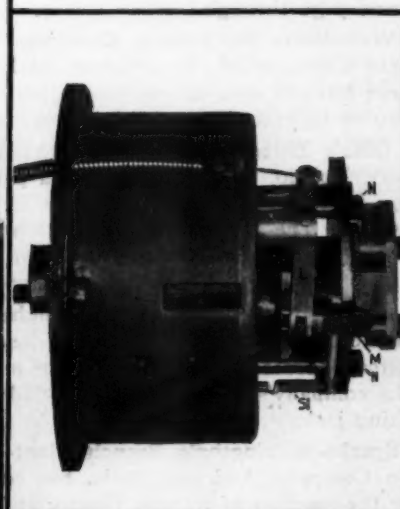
Pedal side of the Volkmar starter. The spring tension is released by pressing P forward by the pedal on the floorboard, pushing the lower end of L toward the left and coupling sleeve and shaft S
